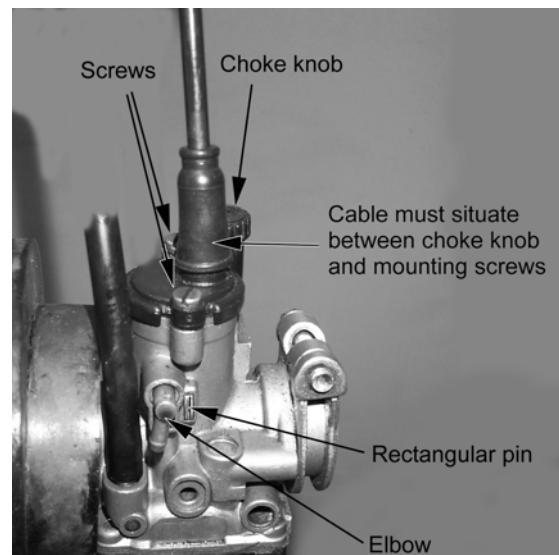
Proper carburetor top installation and location of rectangular slide indexing pin and vent elbows.
